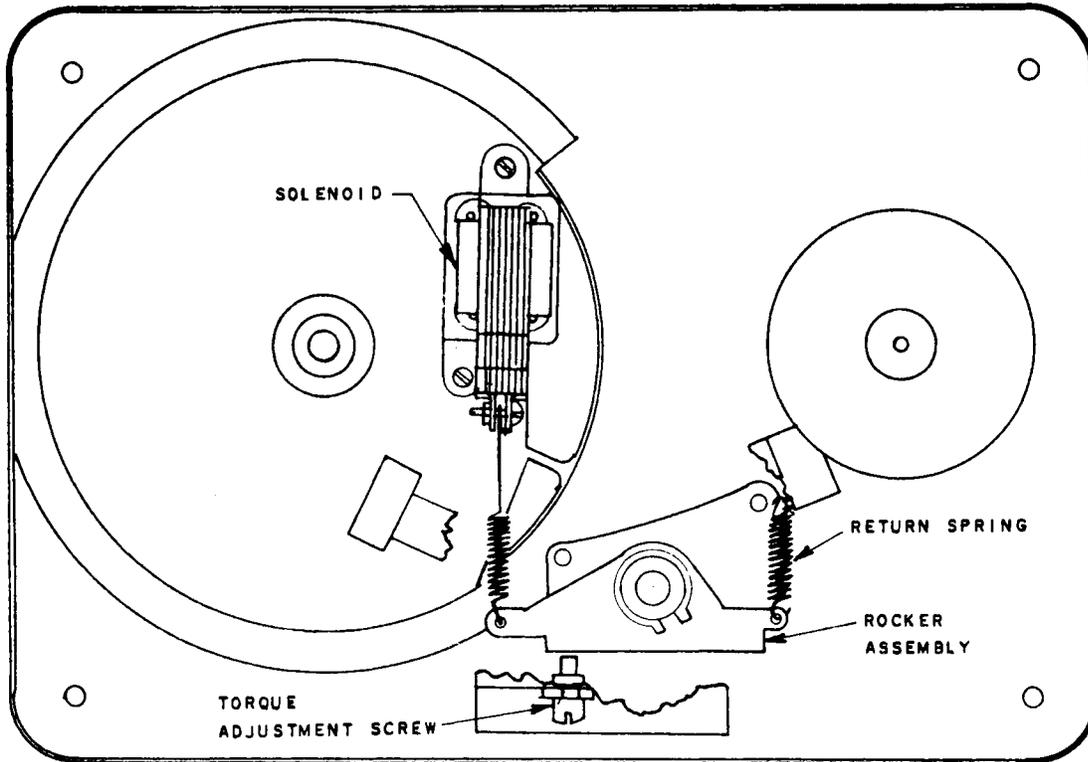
ACTION OF ROCKER ASSEMBLY
